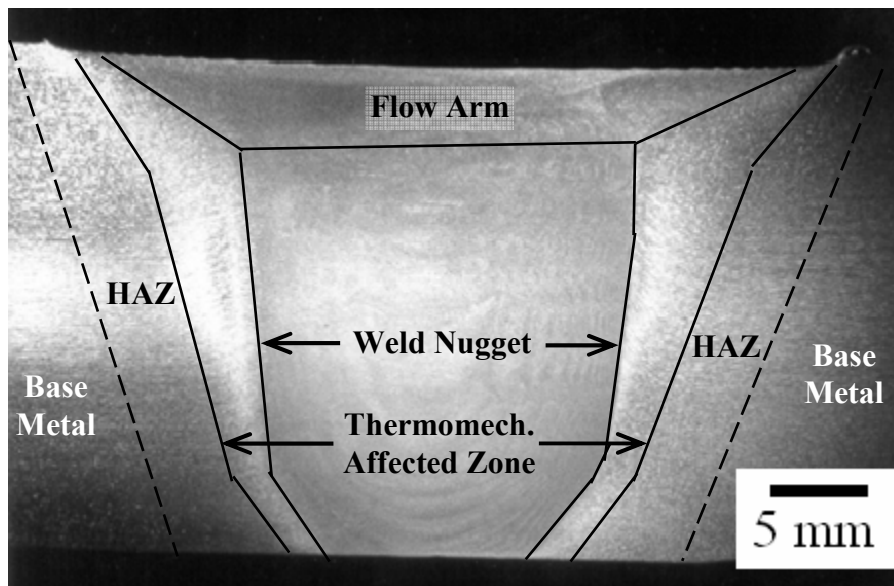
Friction stir welded butt joint of 7050-T7451 plates showing various regions of weld.
